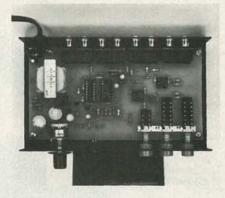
NOTE HOW LED is mounted above the board, not flush with it. All components including transformer and switches, are soldered to board.
